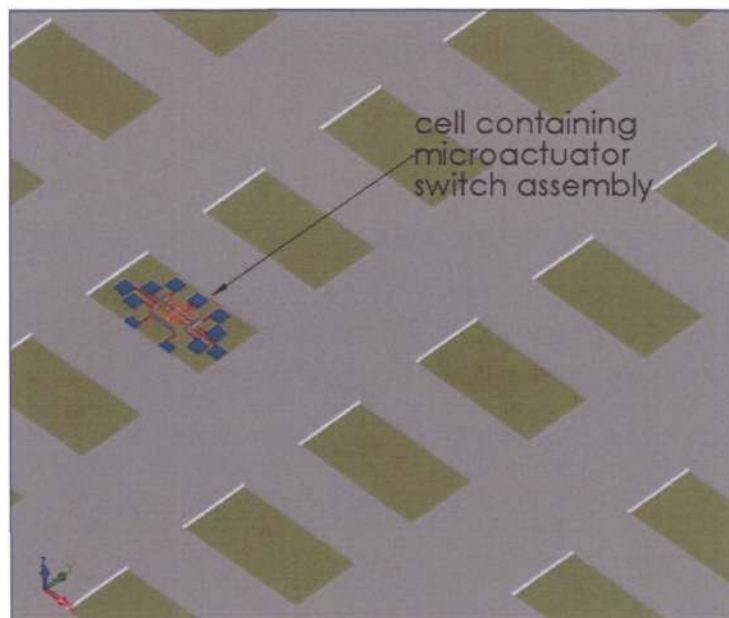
Isometric view of microactuator switch assembly (wafer level)
